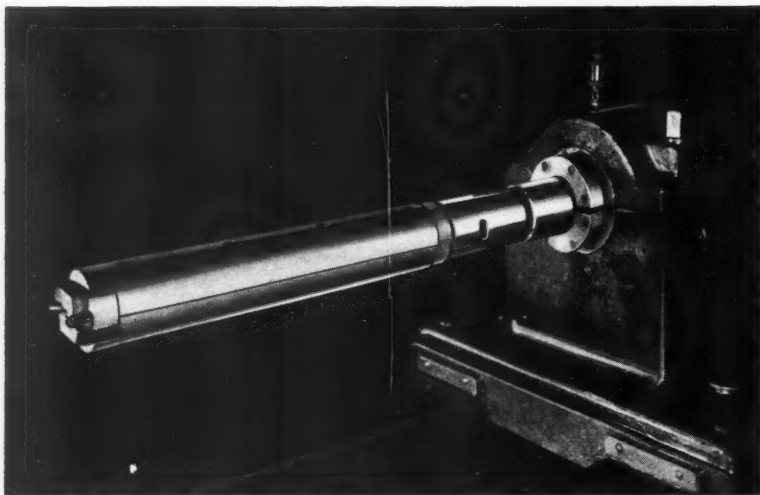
Close-up view of a babbitt-packed reamer showing the carbide-tipped blades. This tool is attached to the boring-bar by means of a bayonet shank which permits it to float
